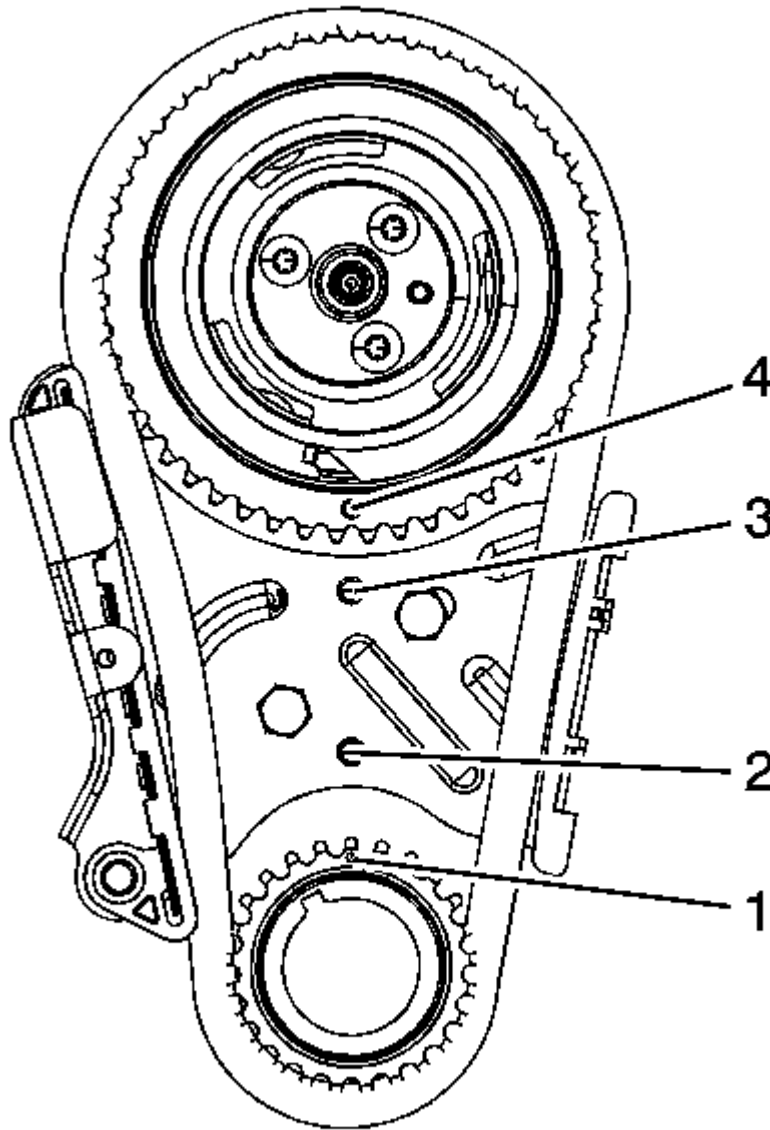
Chain Tensioner, Crankshaft & Camshaft Gear Timing Marks
